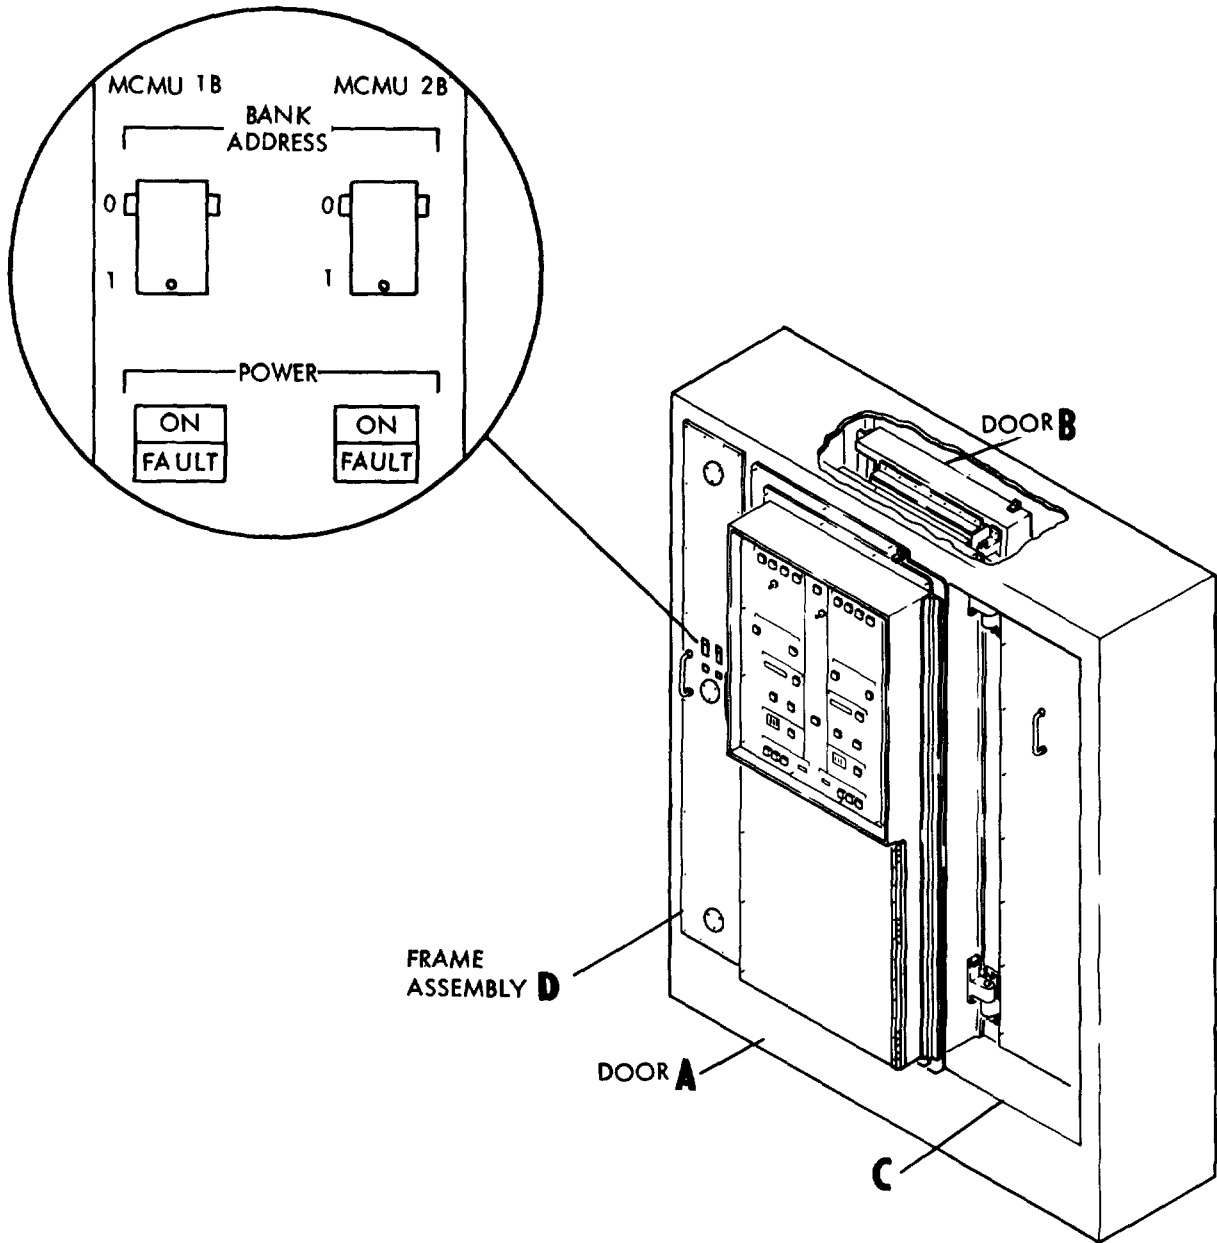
Message Switch ADP Assembly (Sheet 4 of 5).
